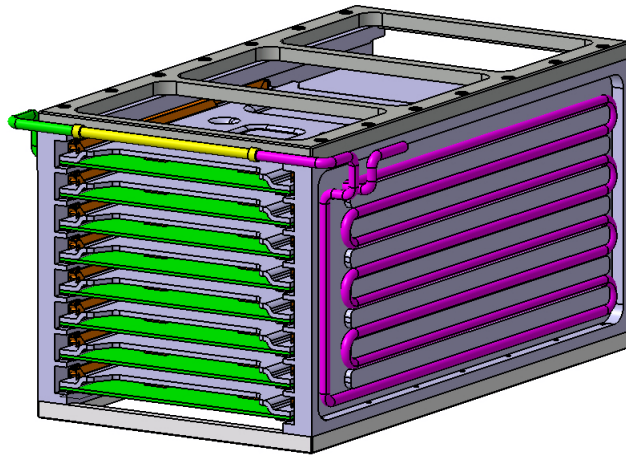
View of the DAQ crate with the 7 waveform digitizer and interface boards and one clock distribution board. Power is produced by the electronic components and removed by the cooling fluid flowing inside the pipe. Heat is extracted by conduction through the thermal circuit composed of the thermal pads, the aluminum plate, the cardlocks, the crate walls and the cooling fluid flowing into the pipe.
